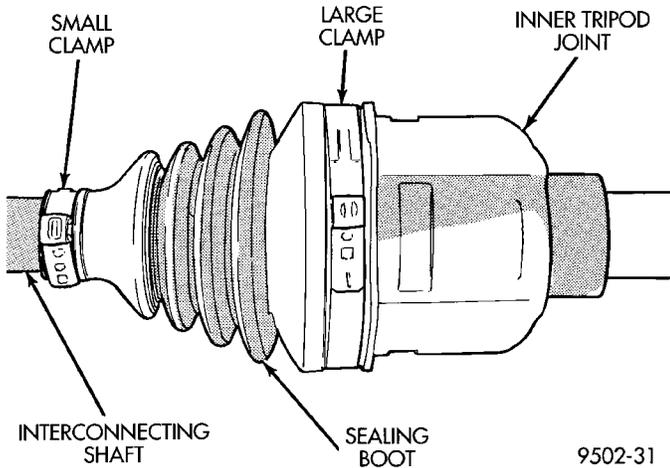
Inner Tripod Joint Sealing Boot Clamps
